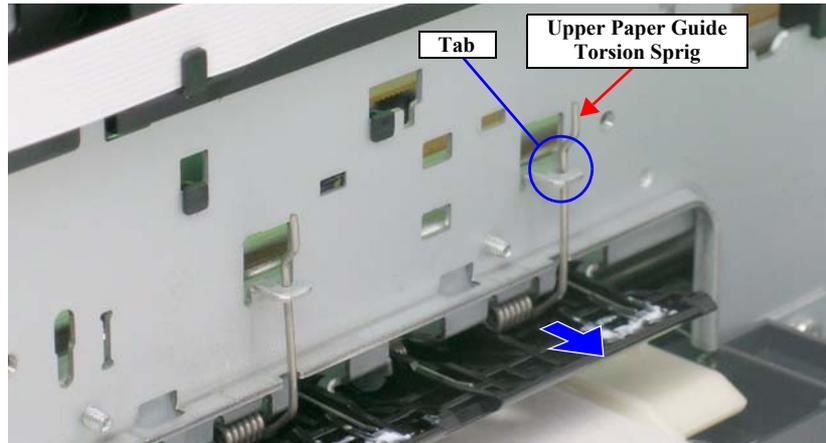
Removing the Upper Paper Guide Torsion Spring
